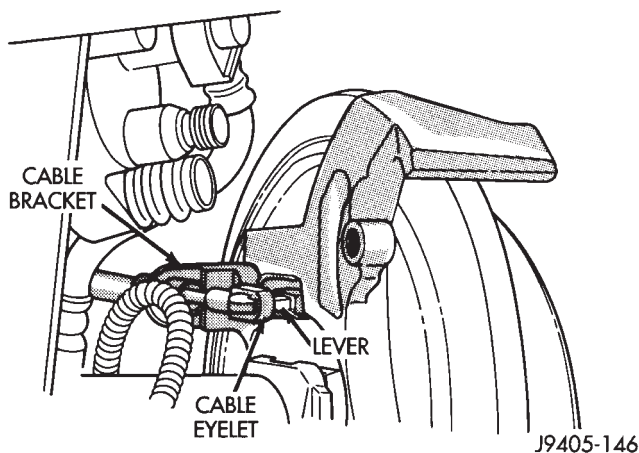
Parking Brake Cable Attachment (With Disc Brakes)
